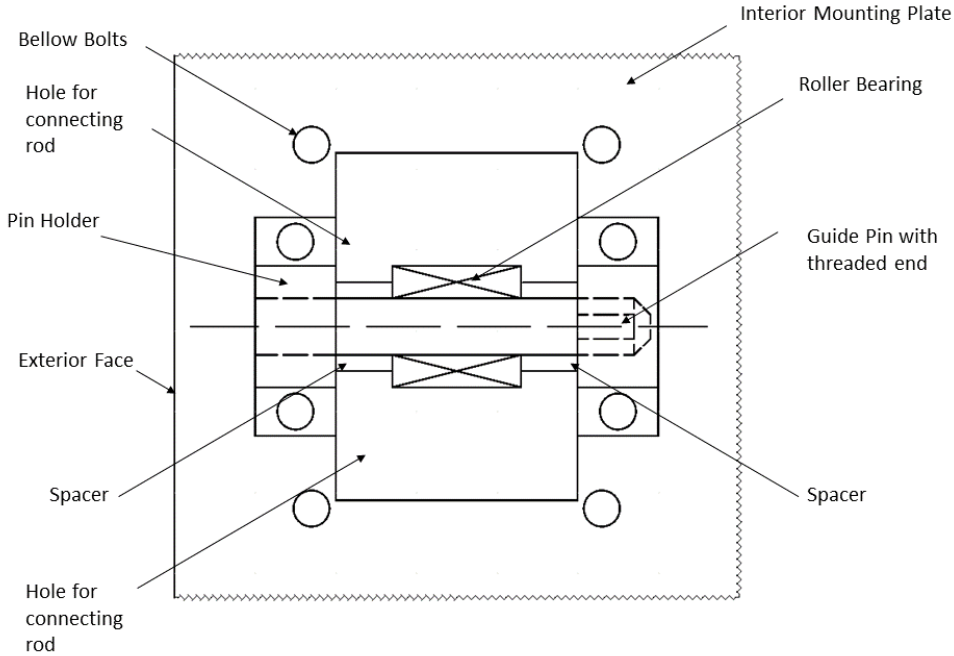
Linkage Top View - Guiding Pin Mount Assembly
